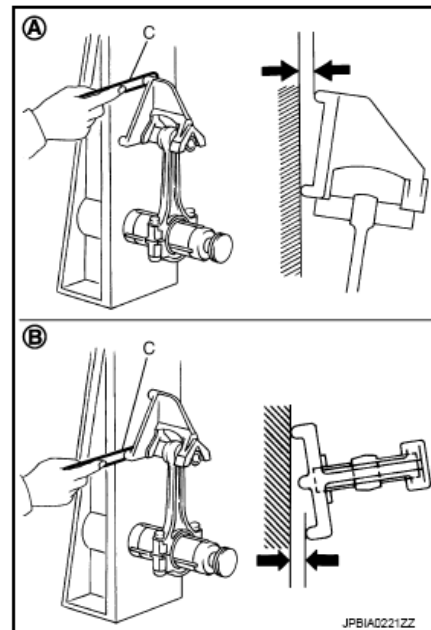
Identifying Connecting Rod Bend And Torsion Using Tool
